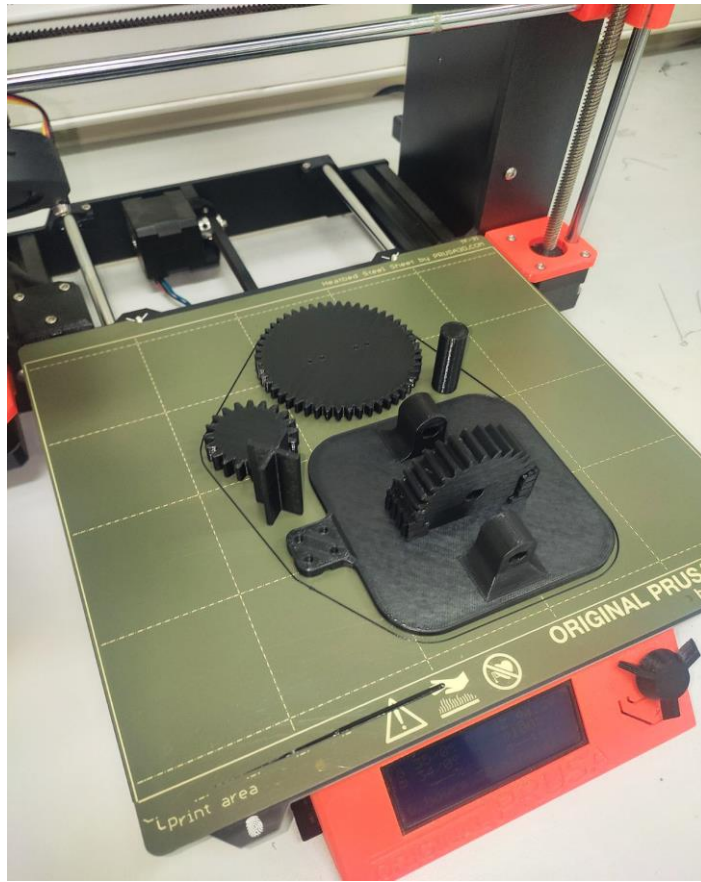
The 3D Printed Components, positioned on the Print Area
